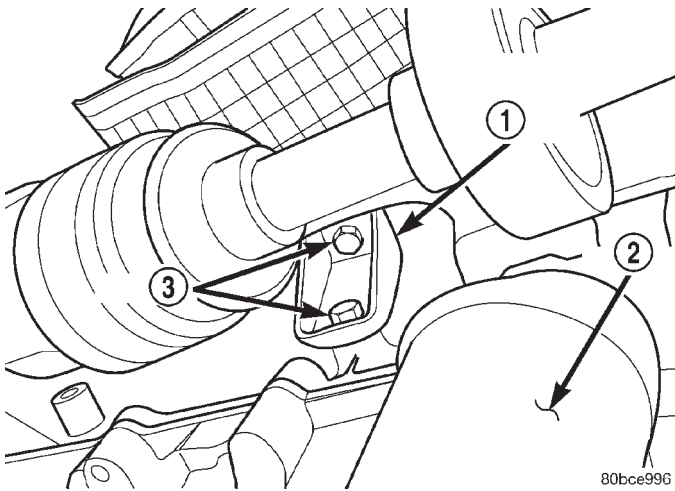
Exhaust Manifold Support Bracket—ULEV
